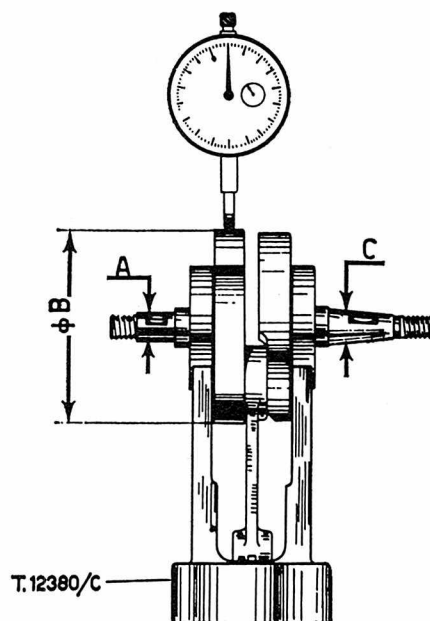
Crankshaft and connecting rod assembly is mounted in special fixture to check eccentricity.
